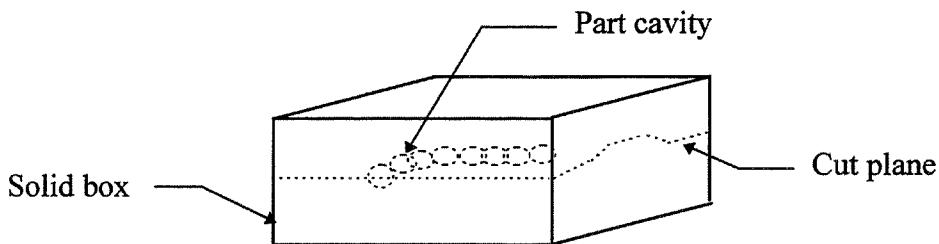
This figure shows how CAD software is used to enclose the part within a solid box. The box is then cut to expose the part geometry.
